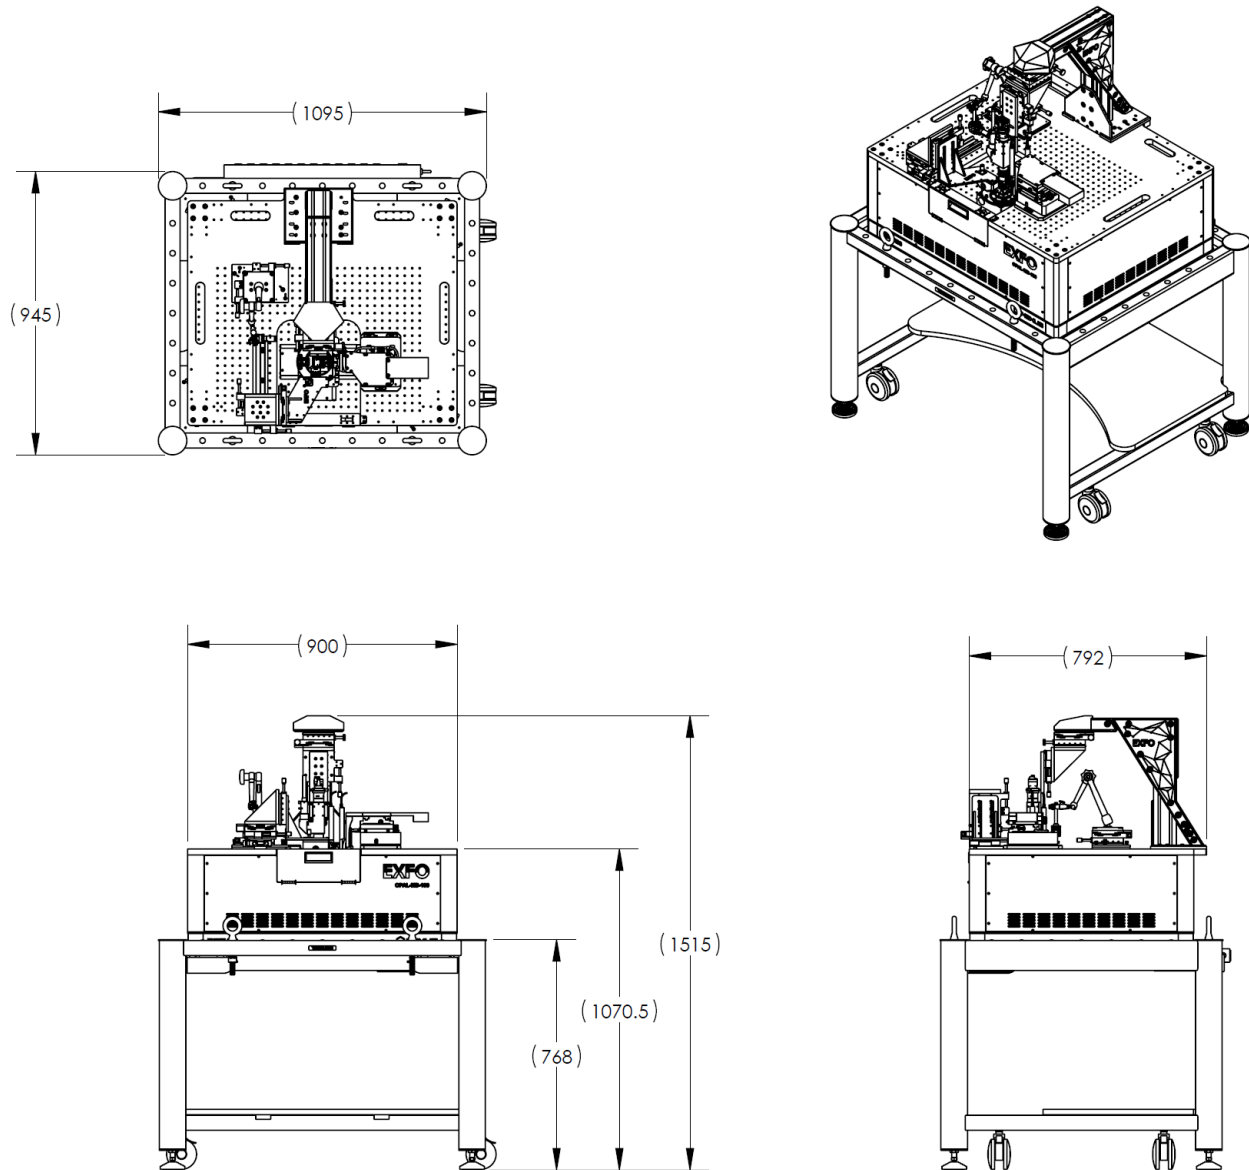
Technical drawing of the OPAL-MD-100 main system with dimensions in millimeters. Shown with one (1x) PRO-S-40 optical head, one (1x) PRE-00 manual electrical head, and one (1x) base frame. Not shown: included industrial rackmount PC and IT kit (monitor, keyboard, mouse). Also not shown: chiller and thermal chuck controller included with -TH1 option, as well as optical and electrical test equipment. Configuration non-final.
